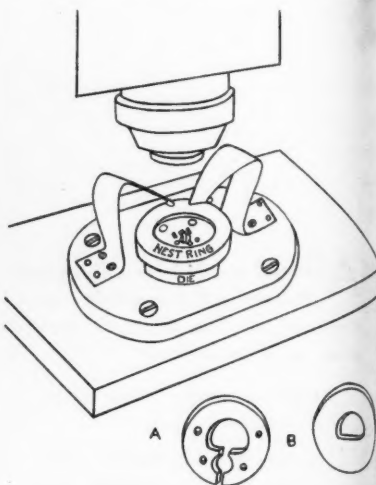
Drawing illustrating design of "flippers" for keeping die clear of stripped parts.
